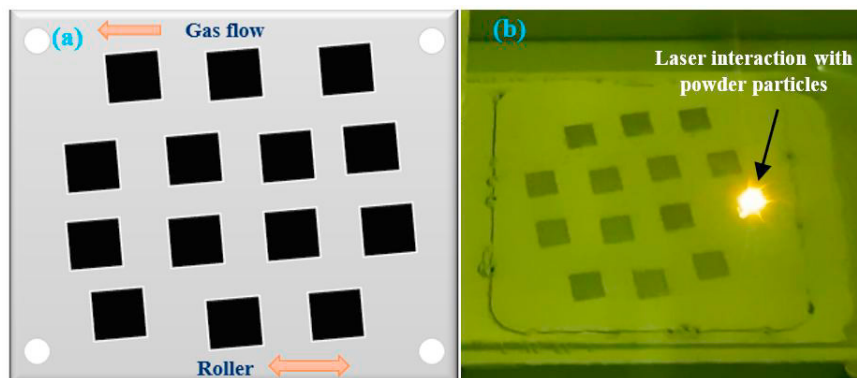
(a) Designed samples in build volume; (b) Fabrication chamber of LPBF machine
